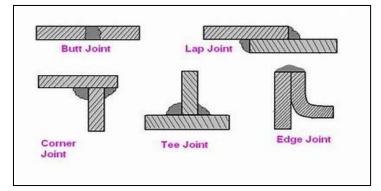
Welded joints in the Design of Machines.
